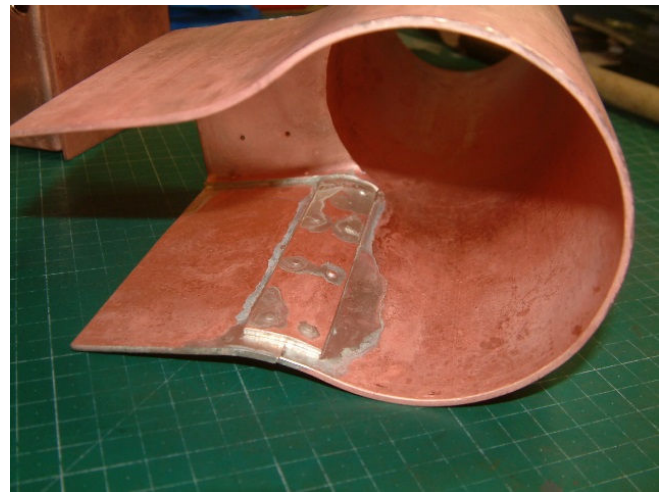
3 1/2" William outer boiler shell construction showing firebox extension and riveted strap after silver soldering of strap joint and throat plate.
